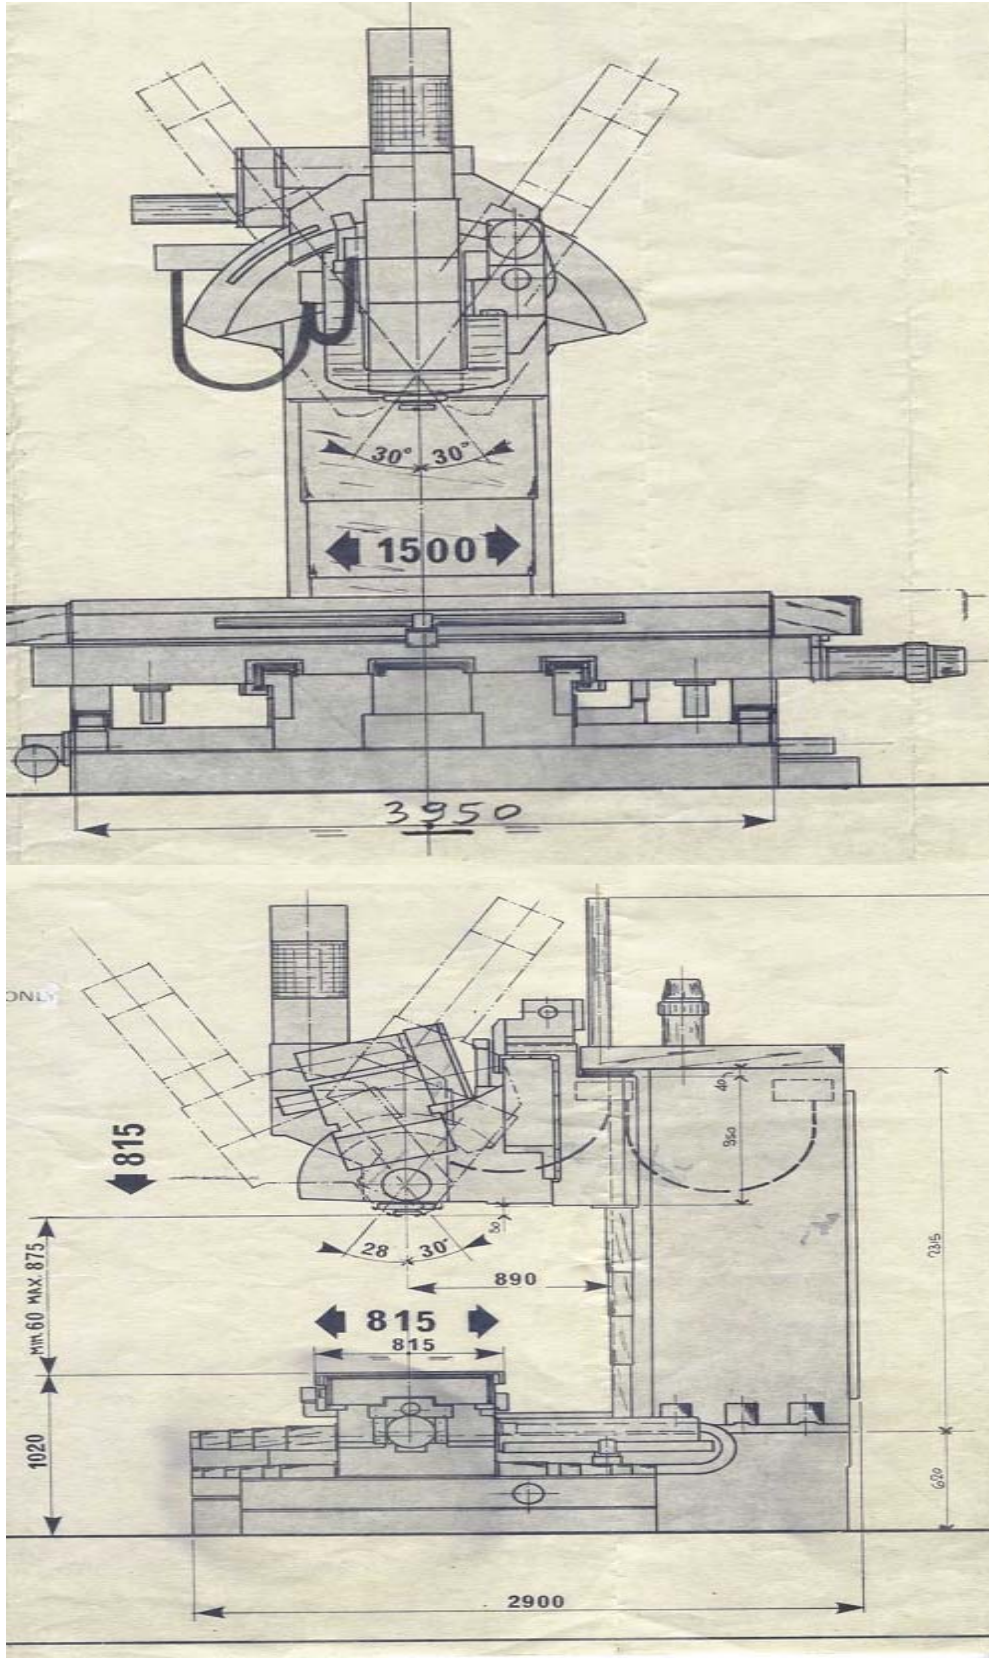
RAMBAUDI CNC HIGH SPEED MILLING MACHINE
